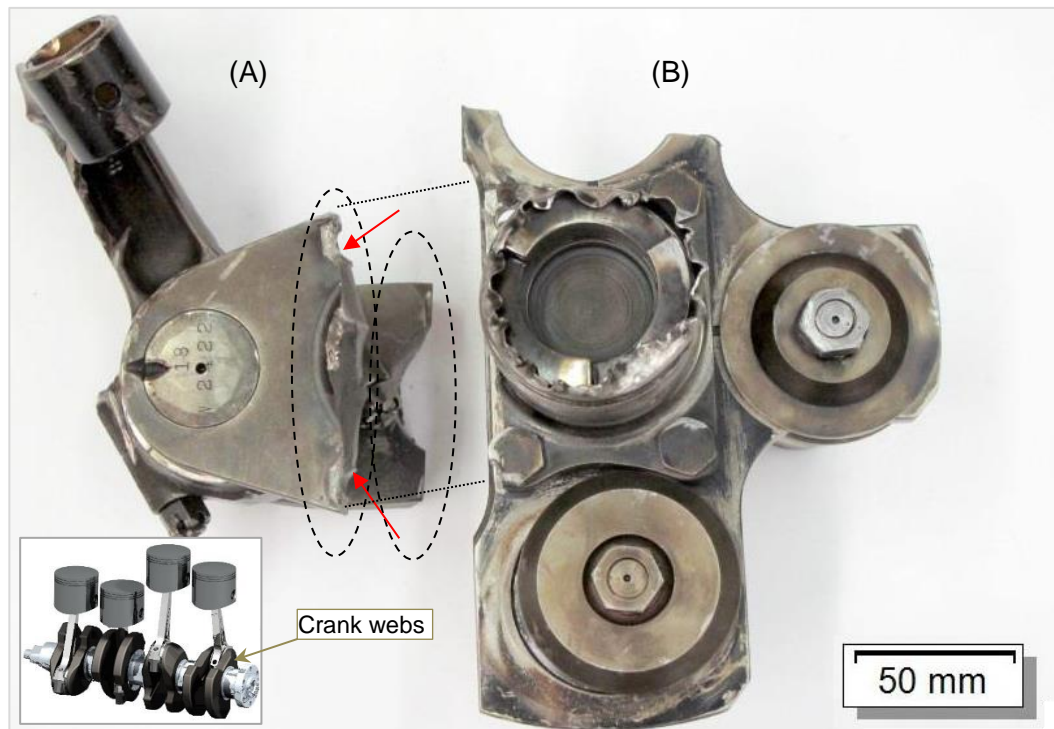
Part (A) with the two broken-off crankshaft webs (marked by broken lines) and part (B) of the engine of HB-ERO for metallographic investigation of the fracture surfaces (red arrows)
